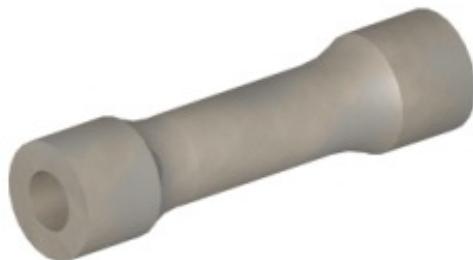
Schematic of contoured gage section tubular test specimen (from Ref 25)
